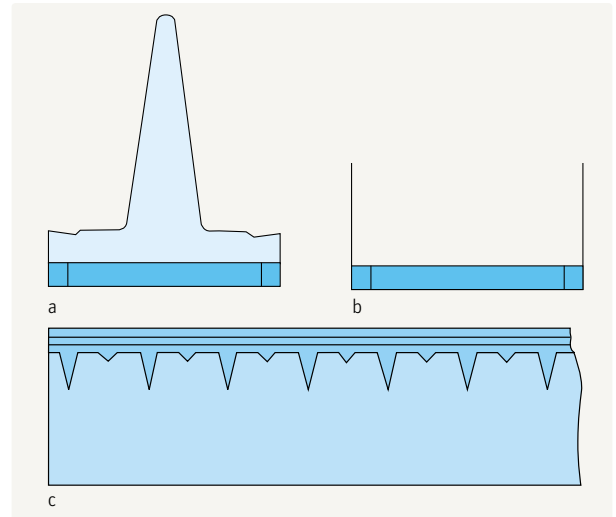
Mounting of the clothing strips (b) on the flat bars (a) using clips (c)
